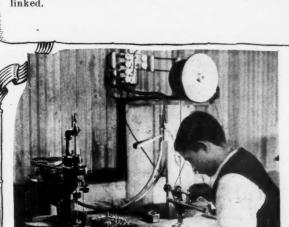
Multiple-spindle drill used for drilling all of the holes in the barrel or air passage of the carbureter. The part is placed in the jig which then accurately locatee the drill points for all twelve holes to be drilled. There are almost as many sizes of drills as there are holes, and they are so arranged that the drilling of all holes with one side of the jig in position can be done at one operation, the other drills not interfering. It takes 2 minutes 20 seconds to complete all twelve
